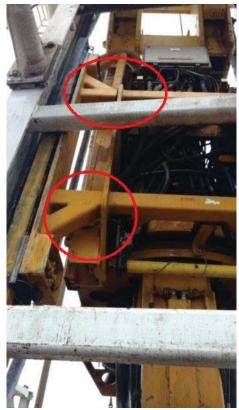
Frame Inspection Areas. Inspect Both Sides.
